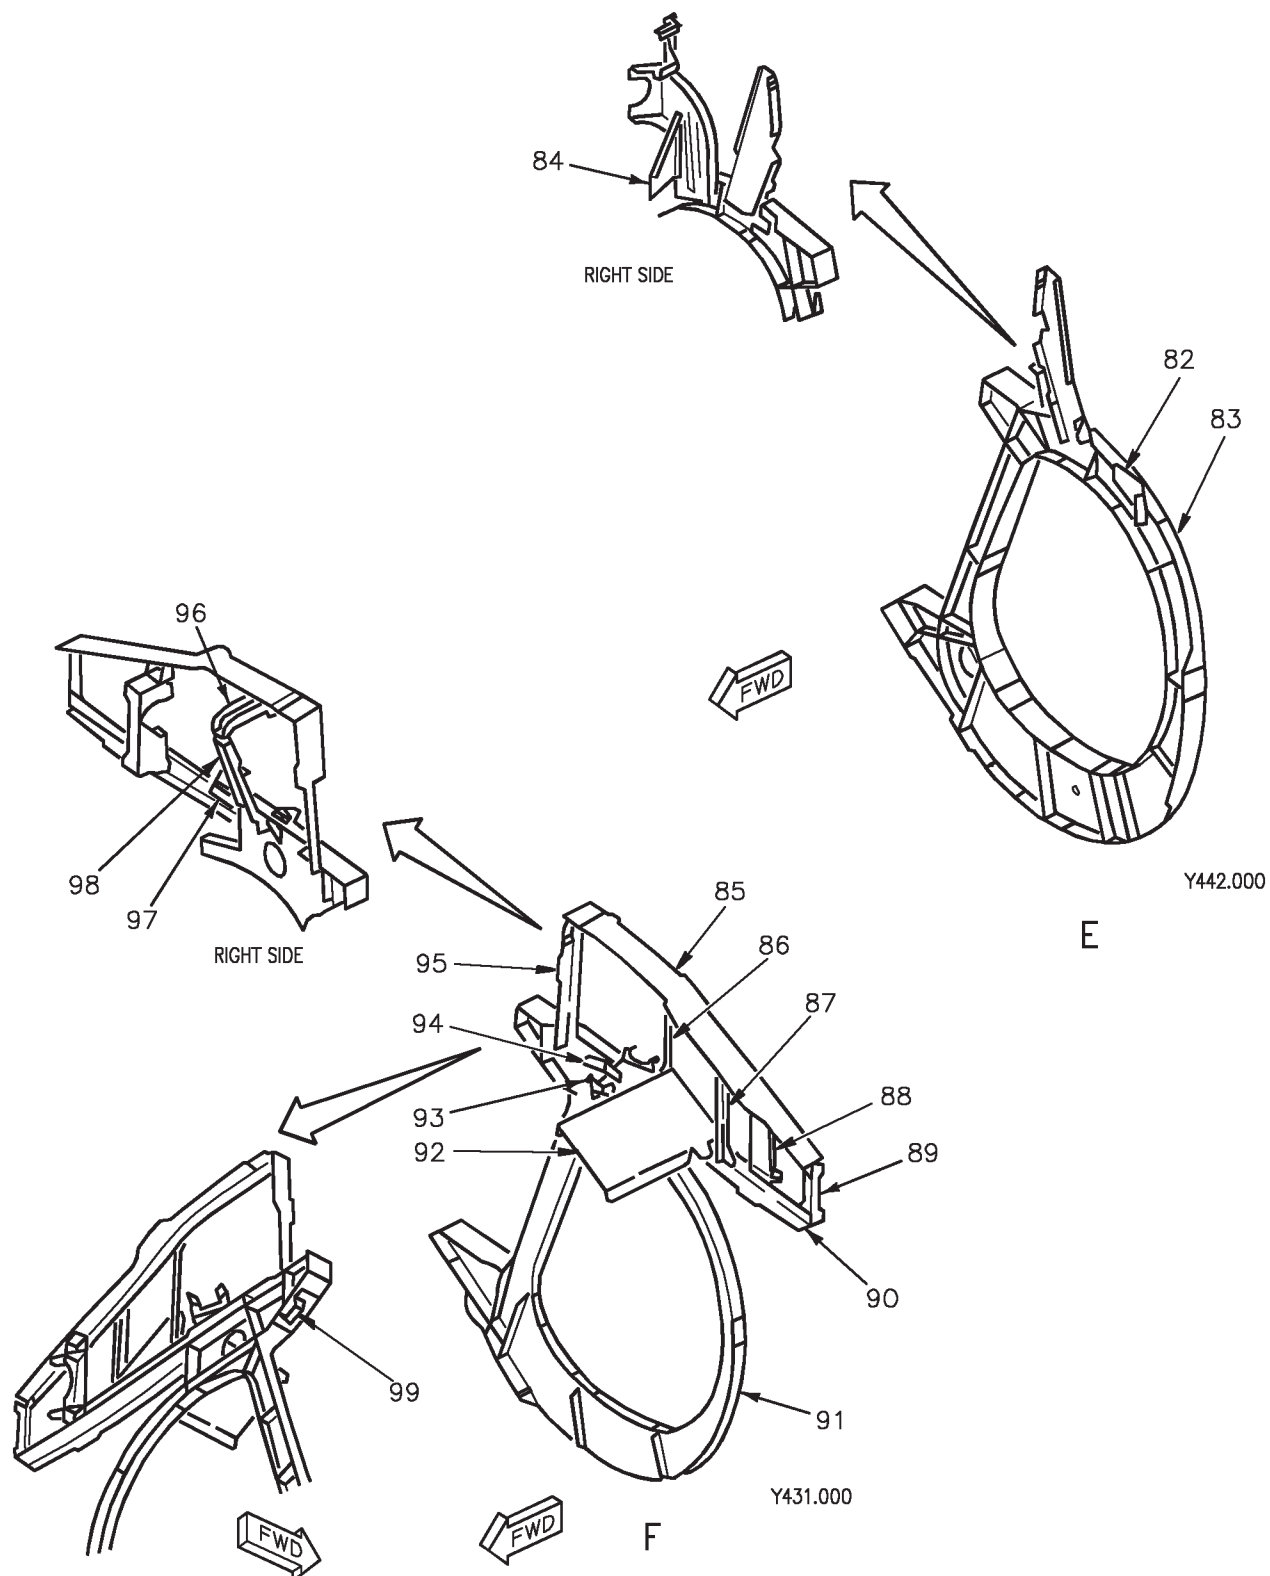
Air Inlet Bulkheads, Formers, Longerons and Stringers (Sheet 5)
